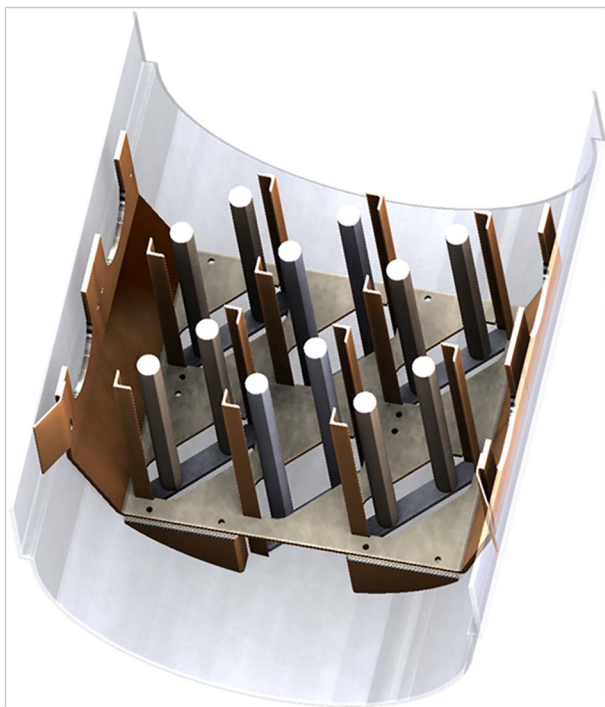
Illustration of magnetic rods mounted on a guiding shoe that will follow the right-angle guiding support frame
